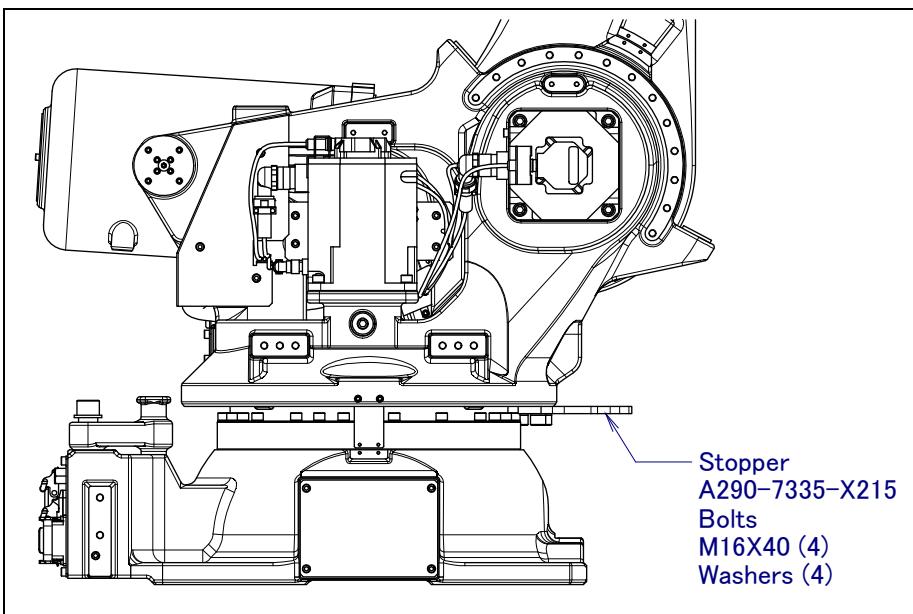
(c) Mounting the J1-axis adjustable mechanical stopper (2/2)
